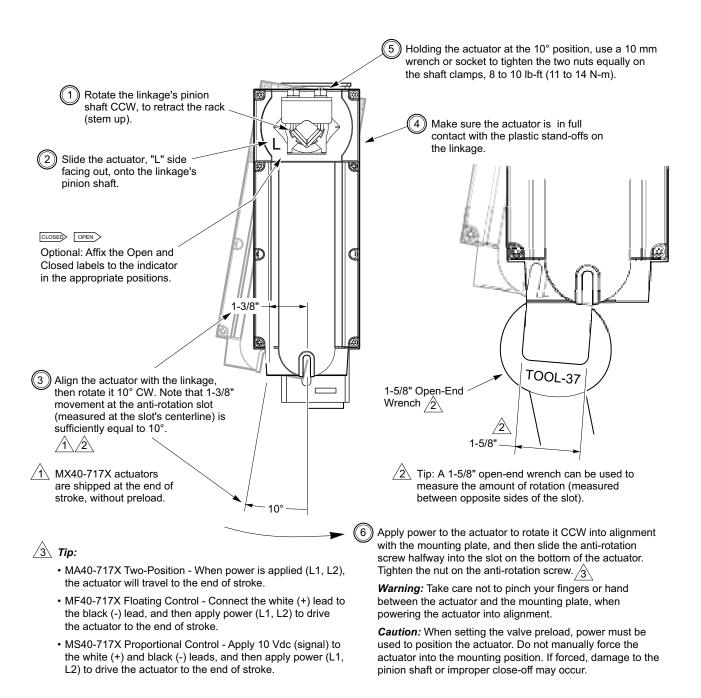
Mounting MX40-717X and Setting up Actuator/Linkage/Valve Assembly.
